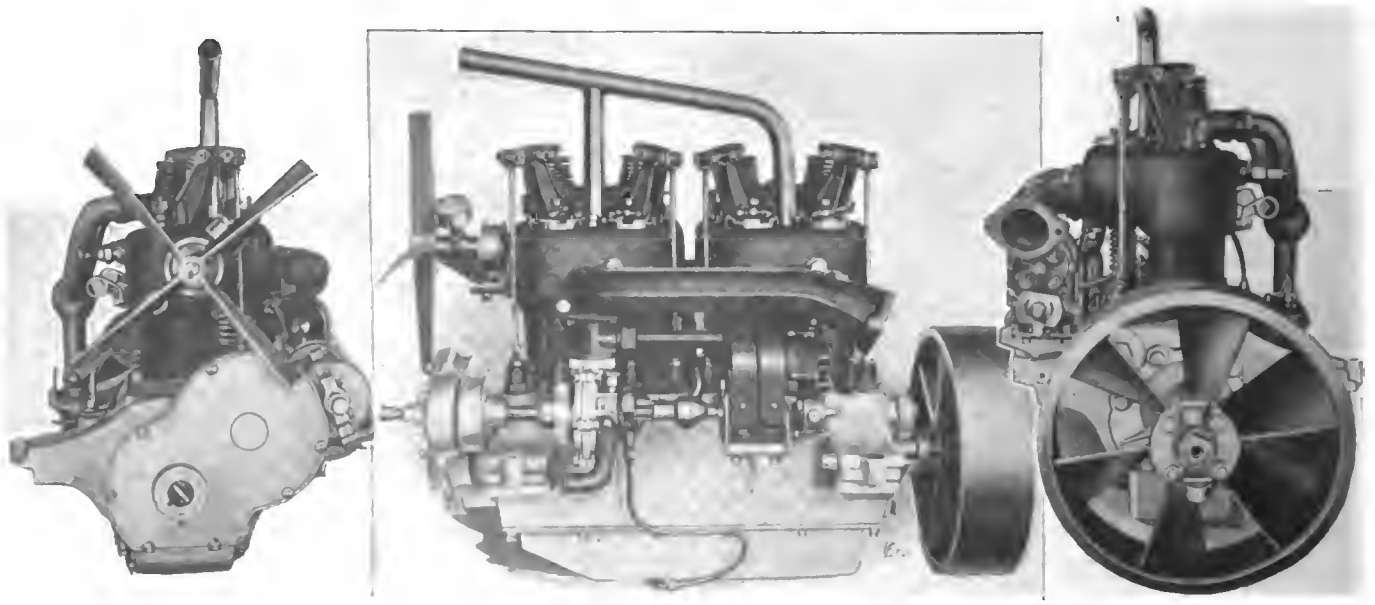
Three views of the motor showing pump and magneto on one side, and a fan in the flywheel
